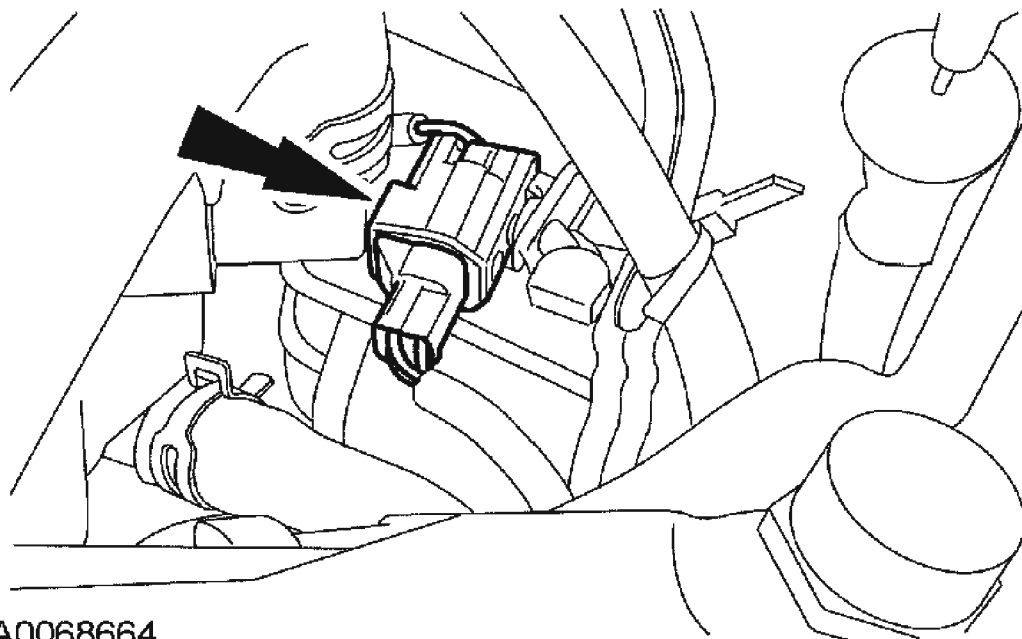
Raising Intake Manifold Enough To Gain Clearance To Disconnect Knock Sensor (KS) Electrical Connector
